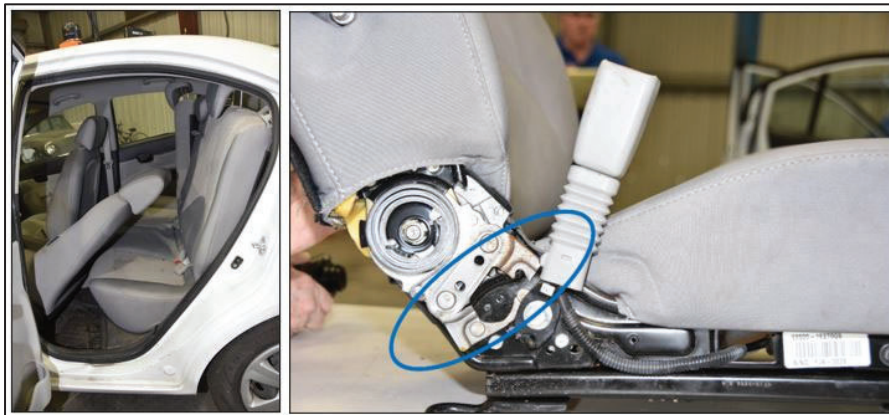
Subject rear-ended vehicle seat with torn inboard lower recliner plate.
